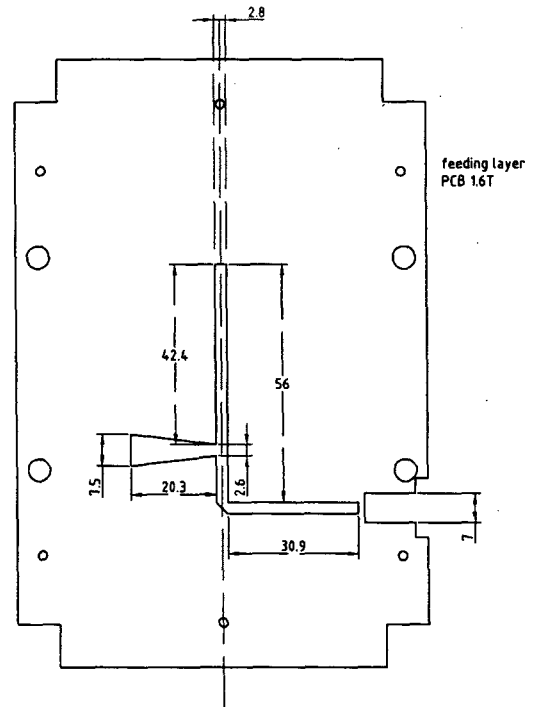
Layout for feeding and tuning stub ($h_1=1.6$ mm).
